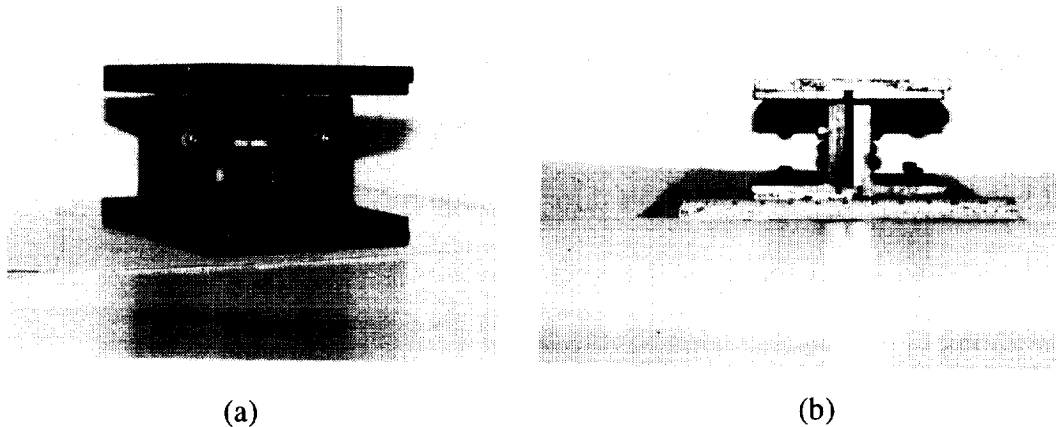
Photographs of the UF-CAI test fixture with 5" tall specimen
